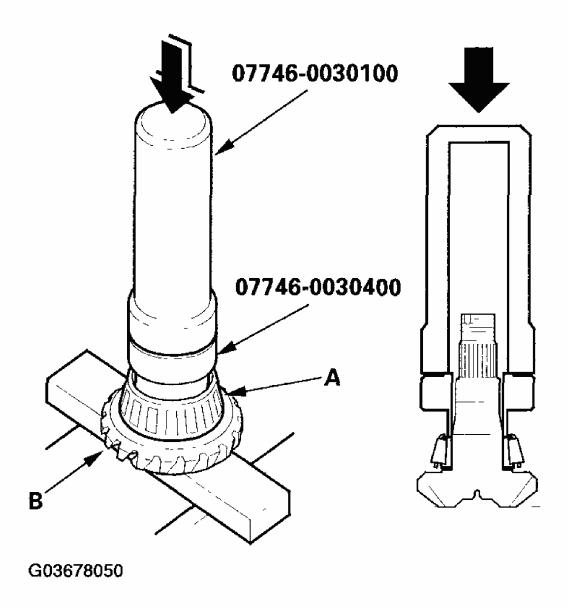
Installing Tapered Roller Bearing On Transfer Driven Gear Courtesy of AMERICAN HONDA MOTOR CO., INC.
